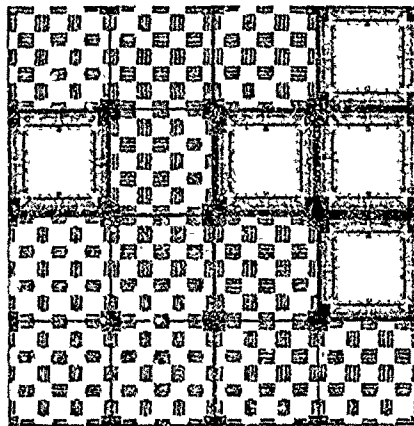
Mounting layer for 5 LSI and 11x9 MSI chips [5]
